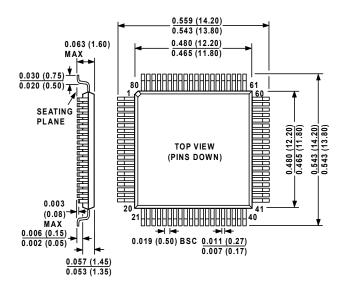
80-Lead LQF Package [LQFP] (ST-80-1)—Dimensions shown in millimetres
